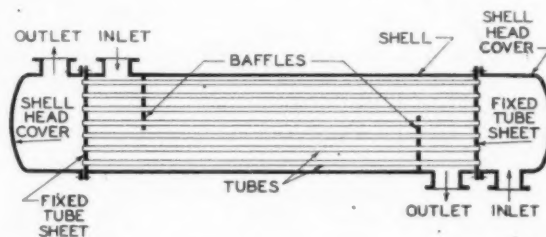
TYPICAL SINGLE-PASS COUNTERFLOW, SHELL-AND-TUBE-TYPE HEAT EXCHANGER WITH FIXED TUBE SHEETS
